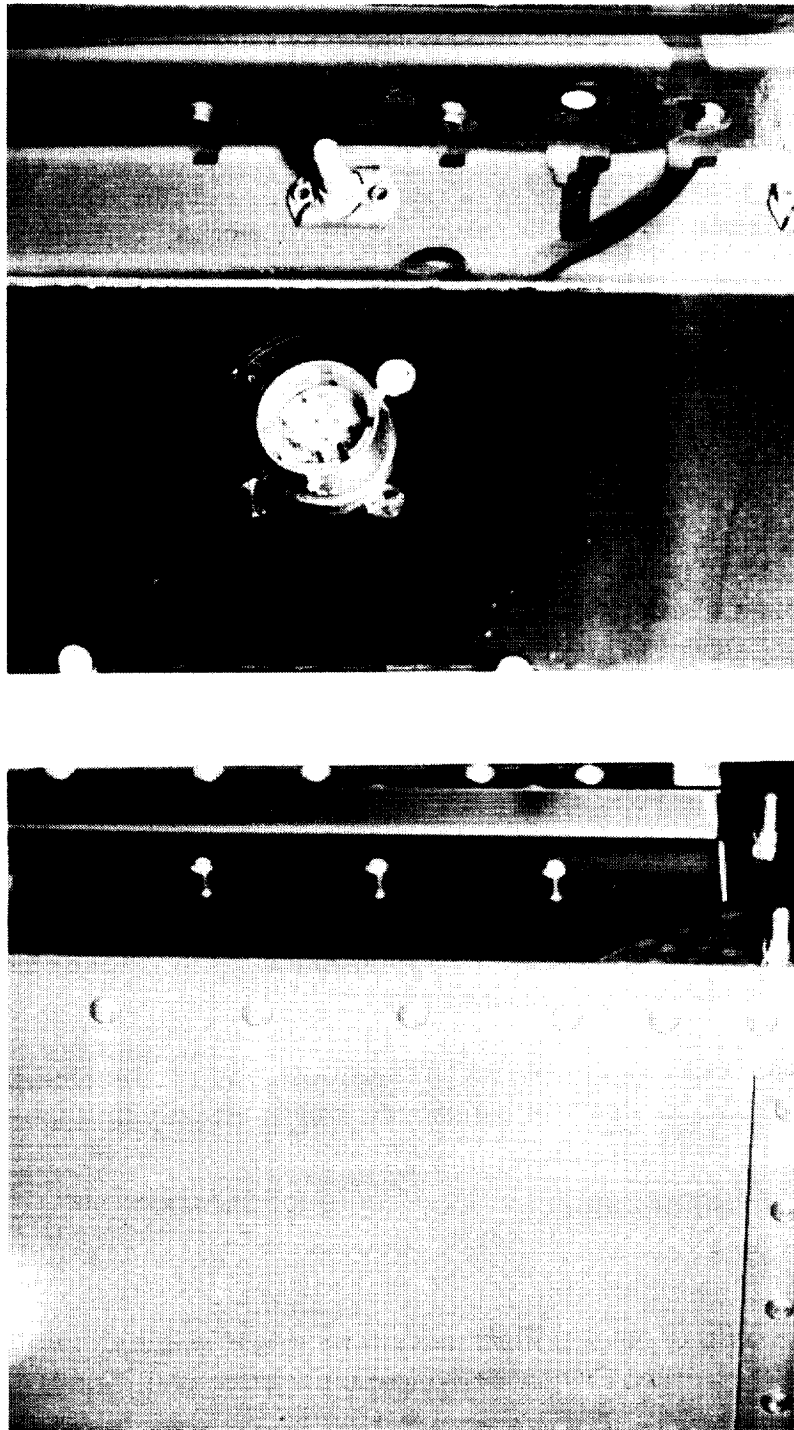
Bolts, wire and rivet shadows on the back of the tray
